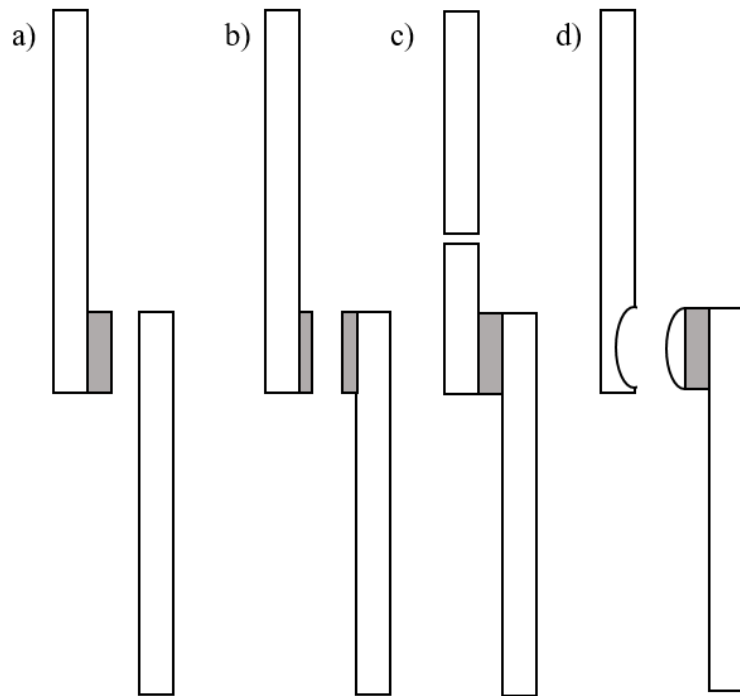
The four types of bonded joint failure modes: a) interfacial or adhesive failure, b) cohesive failure, c) stock-break or adherend failure, and d) fiber-tear or intralaminar failure.
